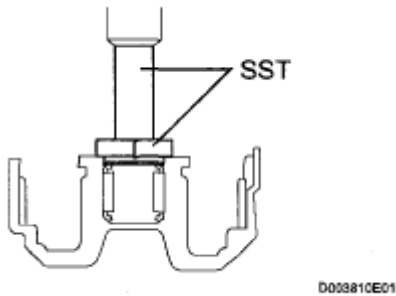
Installing Needle-Roller Bearing To Transaxle Case
